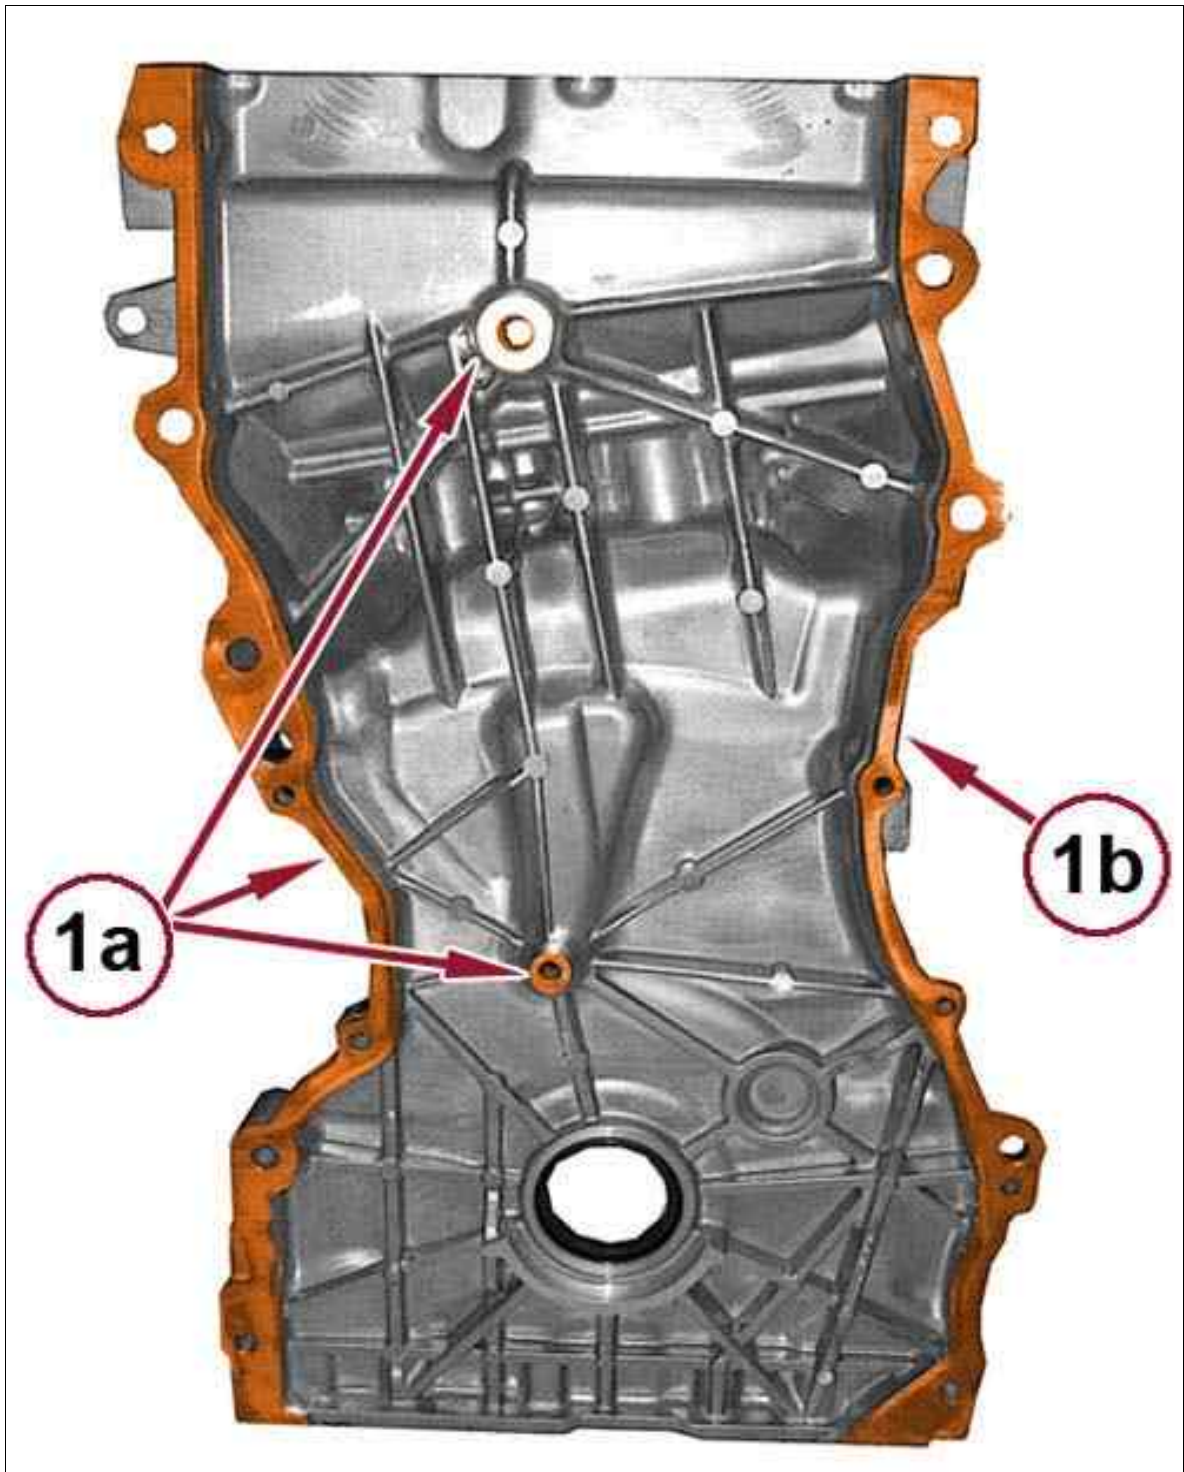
Applying Sealant To Engine Timing Cover To Engine Block Gasket Surface & Oil Pan
